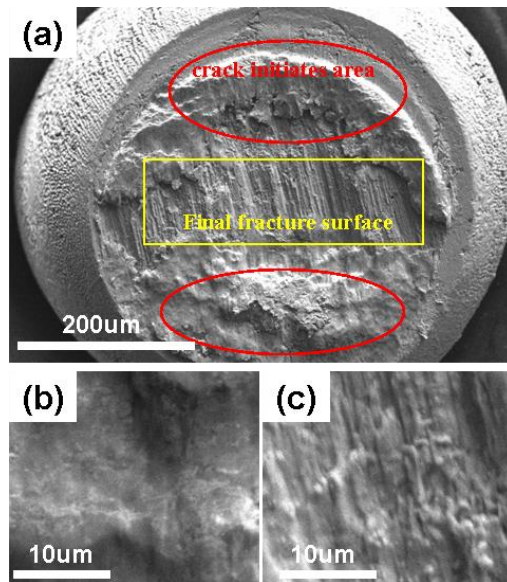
The image of the fracture SAC105 solder surface at chip side (a) overview, (b) microstructure of the crack initiates area located at the solder edge, (c) microstructure of the final fracture surface due to over shear located at the center of the solder.
